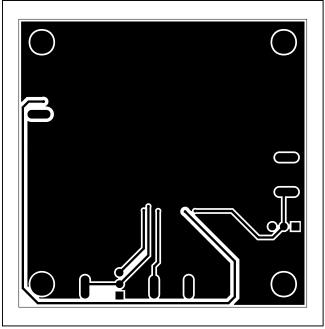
MAX17506 3.3V Output EV Kit PCB Layout—Solder Side
